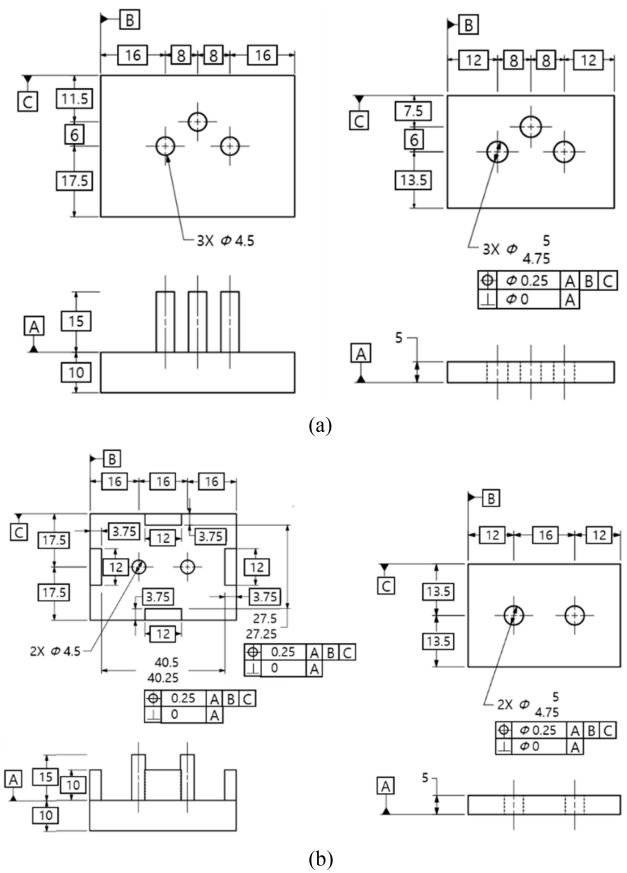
Drawings of two example designs shown in Fig. 10, with extra assembly features added. All numbers in [mm]
